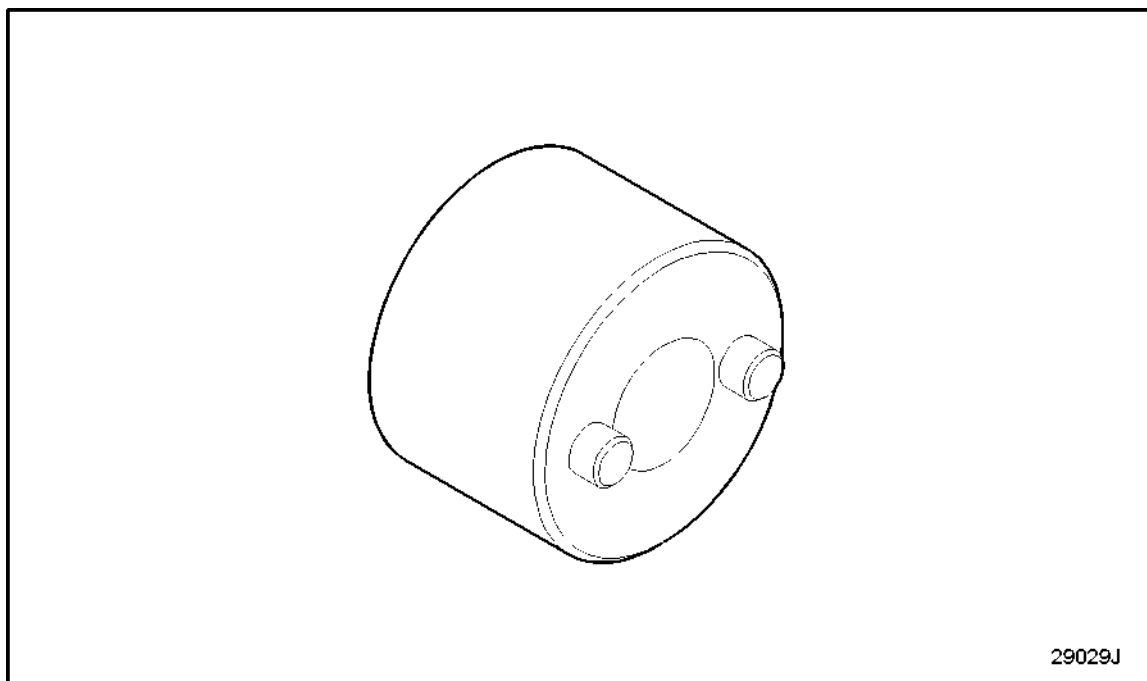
Block Air Box Core Plug Rem/Inst,J 23019
